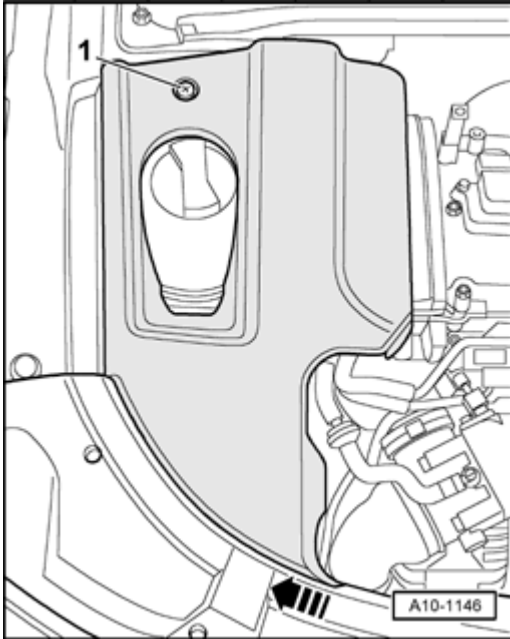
Removing Screw And Coolant Expansion Tank Cover
